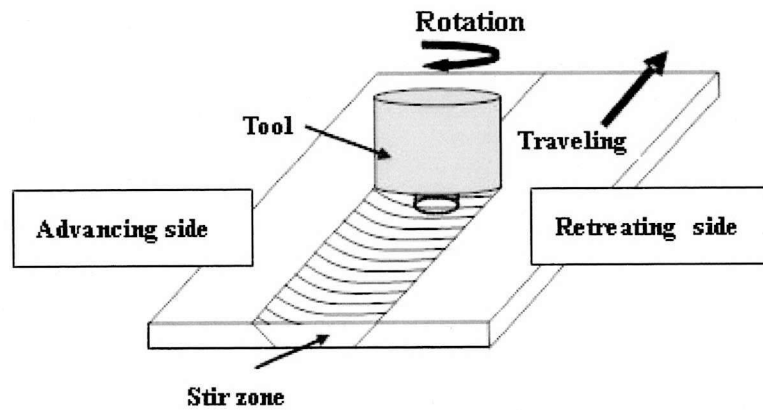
Schematic illustration of Friction Stir Welding(FSW).
